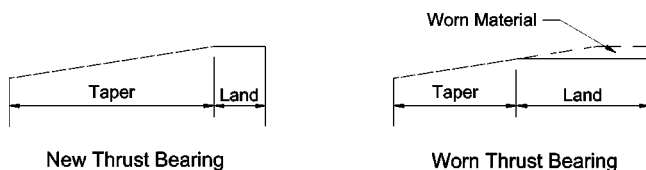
Reduction of thrust bearing tapers due to wearing of the lands
